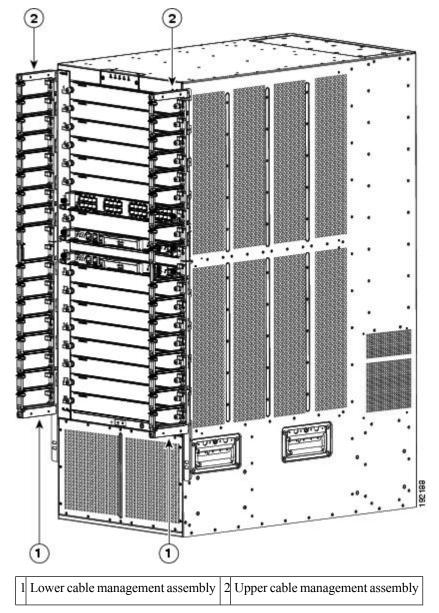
Cable Management Assemblies Attached to the Rack-Mount Brackets
